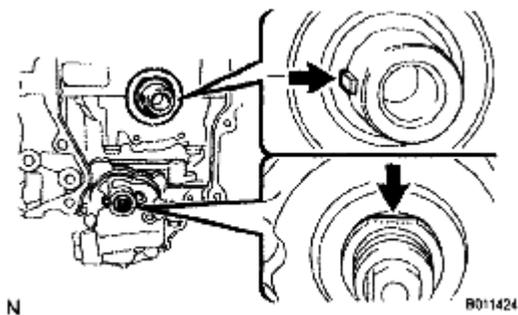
Locating Crankshaft Key And Cutout Of Drive Shaft
